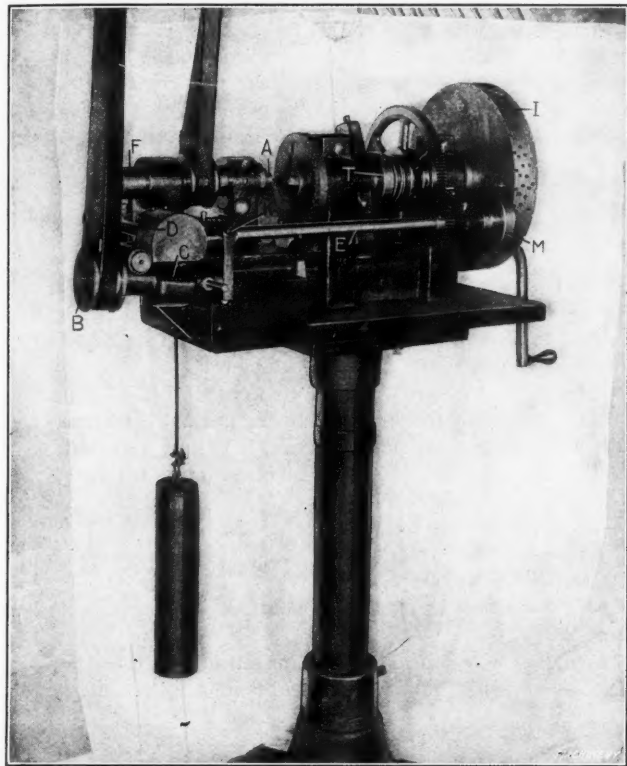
Rear View of Special Index-plate Drilling Machine designed by the Oesterlein Machine Co.
